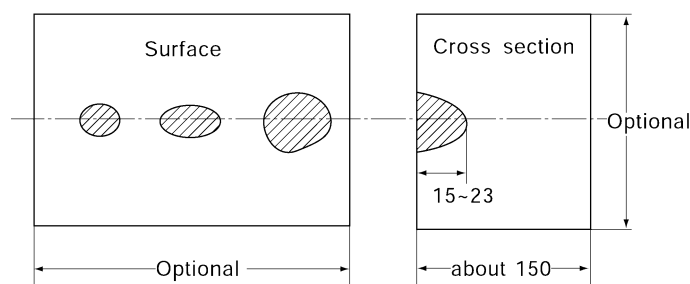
Test of mold cavity welding (Unit : mm)
